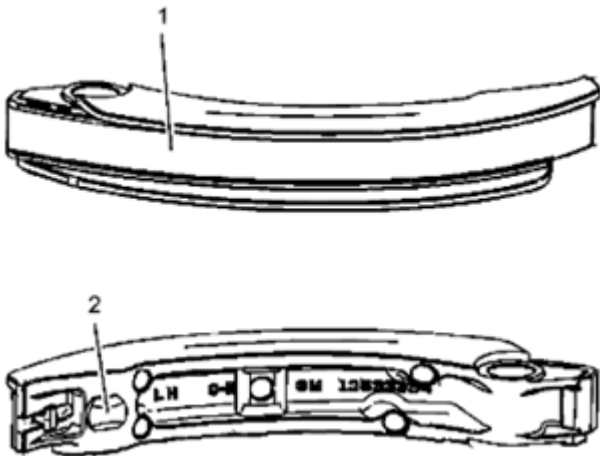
Removing Lock Pin From Timing Chain Tensioner Adjuster No. 3
